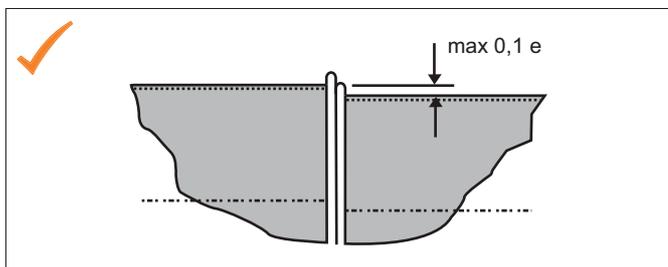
Butt-weld with mis-alignment of pipe (acceptable)
